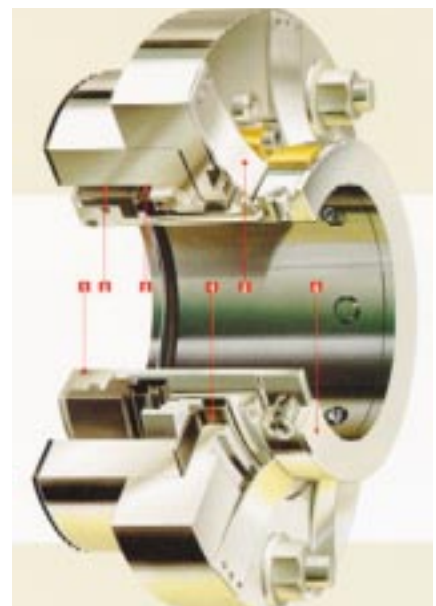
Flushless slurry seal cut-away, 1- O-ring, 2- open gland chamber, 3- seal face, 4- diaphragm, 5- springs, 6- lock ring (156 Heavy Duty Slurry Seal, source: A.W. Chesterton Company, Stoneham, MA)
